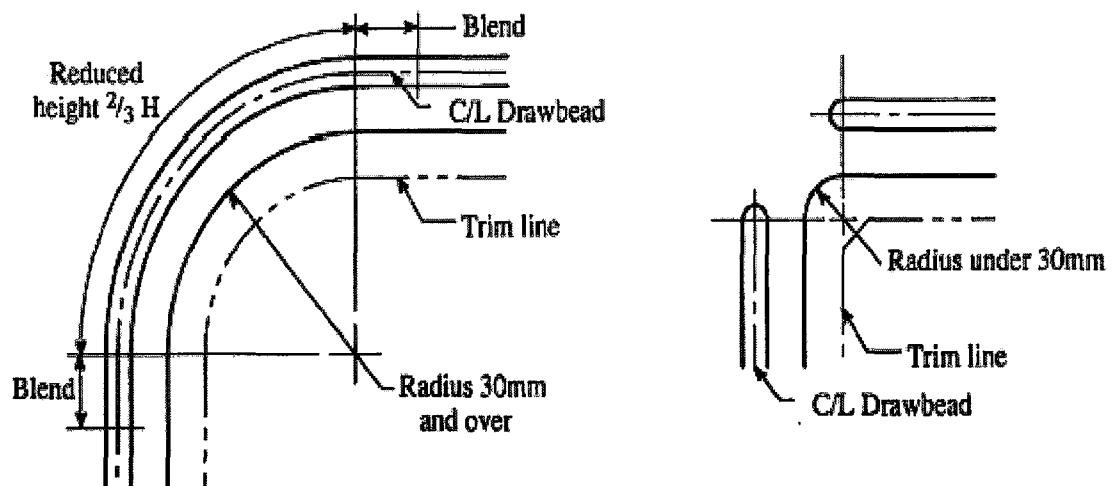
Position of Drawbeads: Trim Line on Punch
